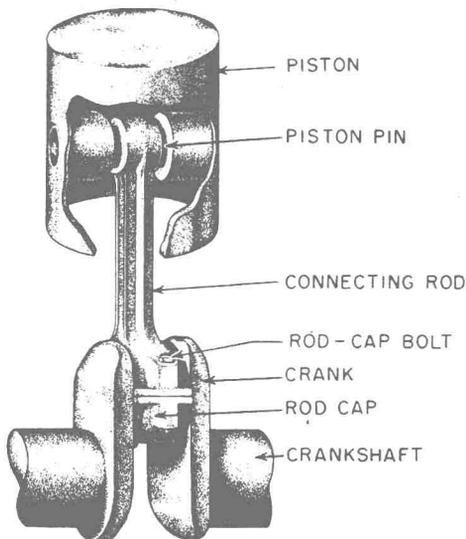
Piston and connecting-rod assembly attached to a crankpin on a crankshaft. The piston rings are not shown. The piston is partly cut away so that you can see how it is attached to the connecting rod.
